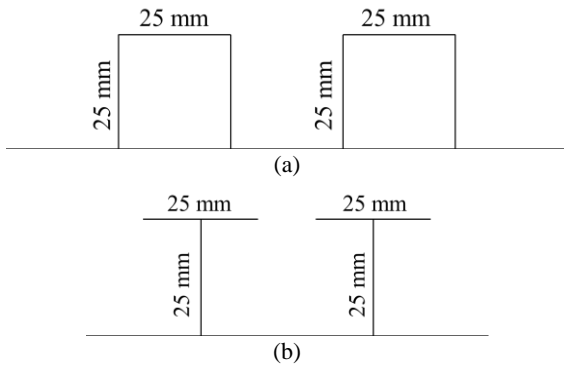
(a) Dimensions of HAT stringer (b) Dimensions of I section stringer
